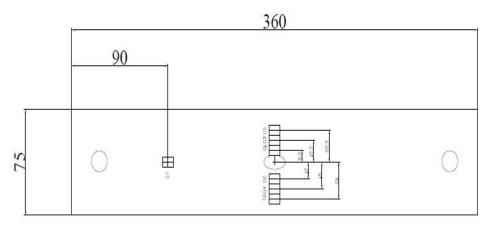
Drawing for ellipse cutout and strain gauge mounting
